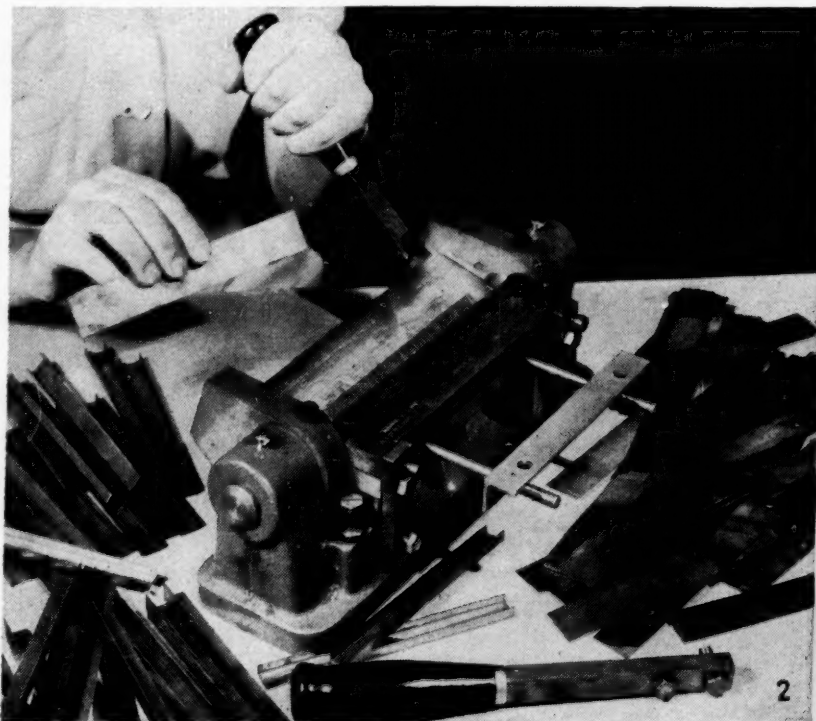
Heavy duty bench brake easily forms channel or angle sections to any combination desired
